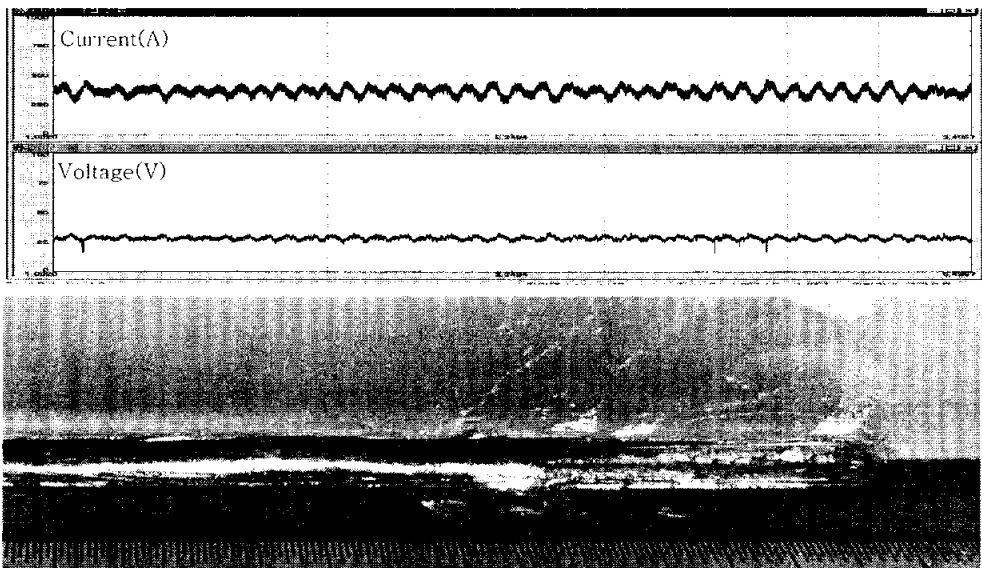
Waveforms and bead shape at welding current 368A
